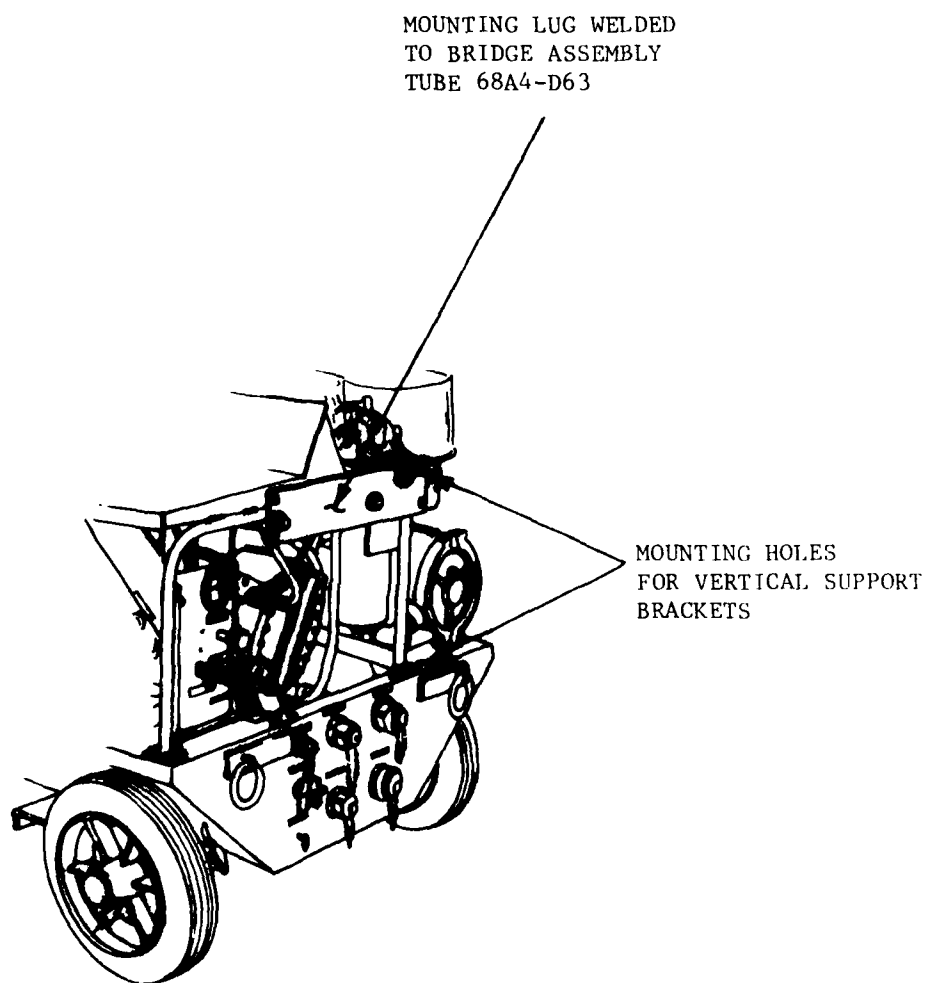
Mounting Lugs and Attachment Points to AHT-64 Chassis
